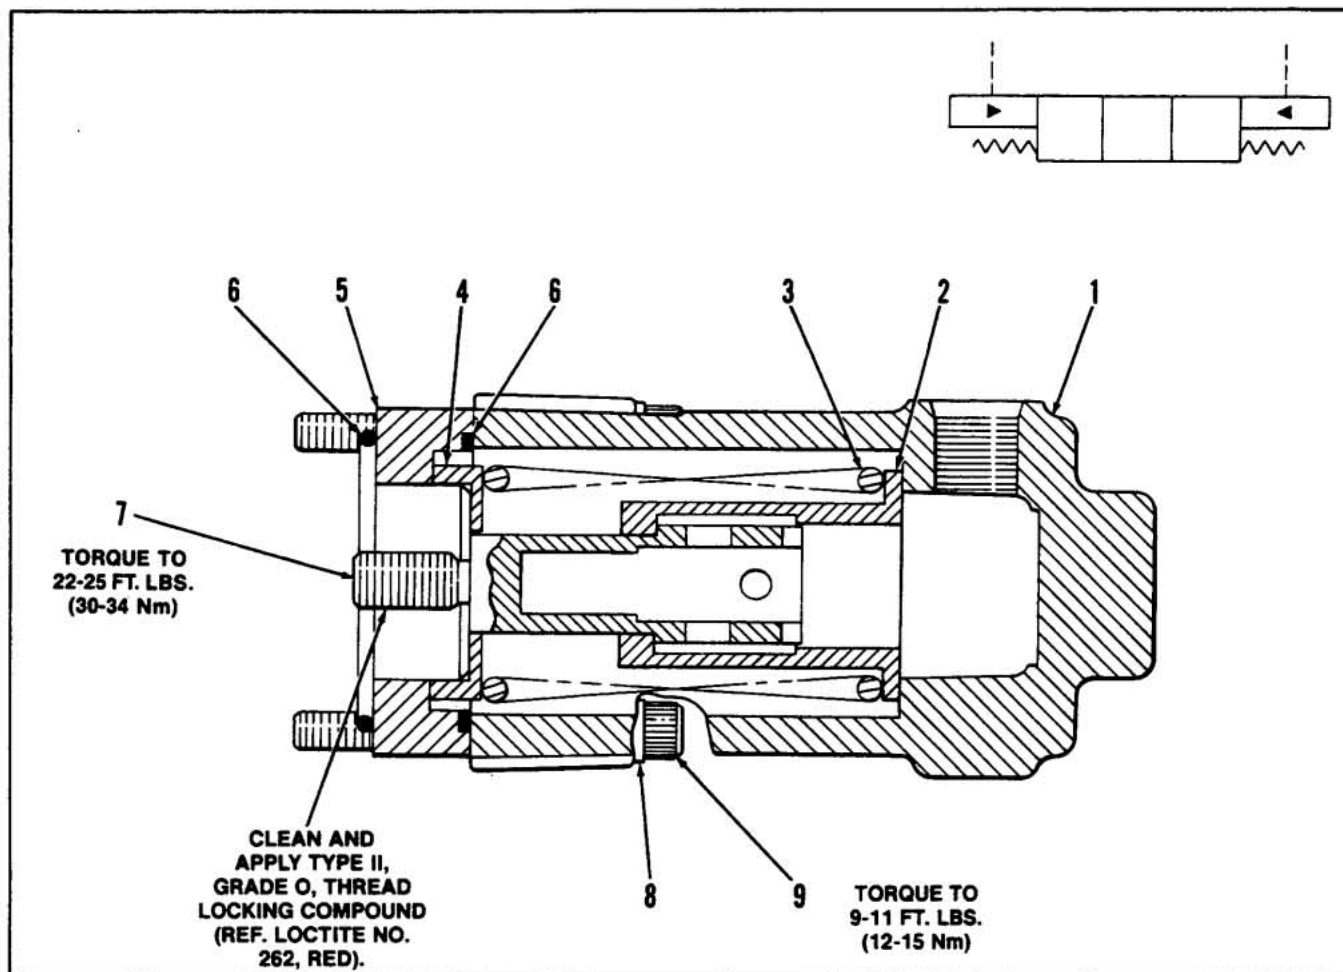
3-Position Float or Regenerative Hydraulic Remote Positioner ("A" Port End).
